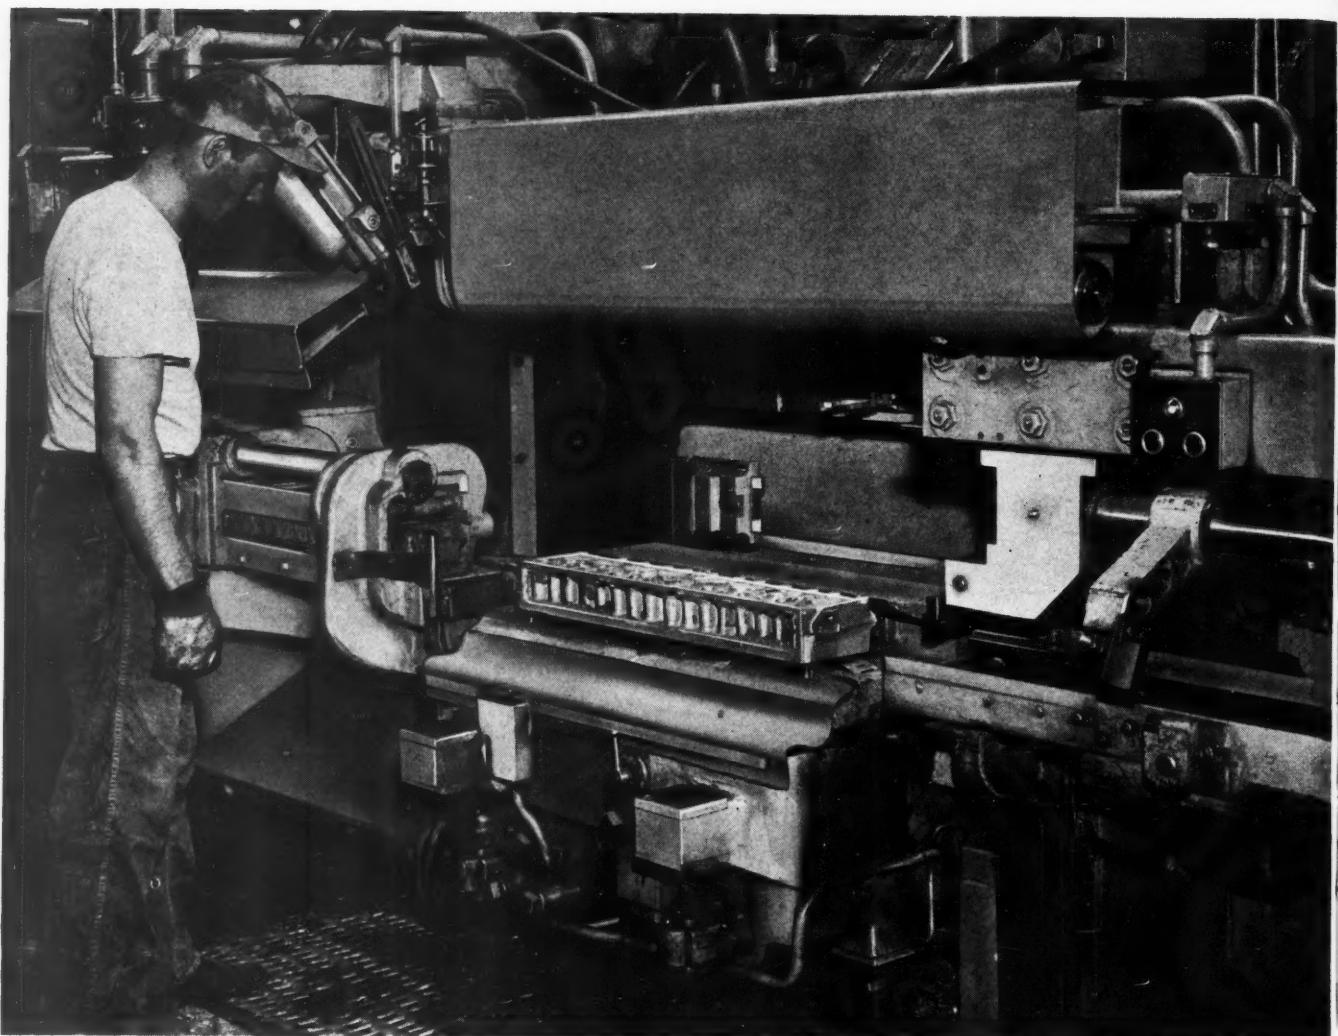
(Above) First or loading station of two-way, horizontal broaching machine seen in the heading illustration. The work is clamped hydraulically and then rotated through an angle of 90 degrees in the vertical plane for broaching the top and spark plug side of the head
